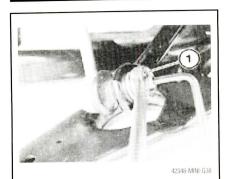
Releasing nuts on bottom of the stabilizer bar
